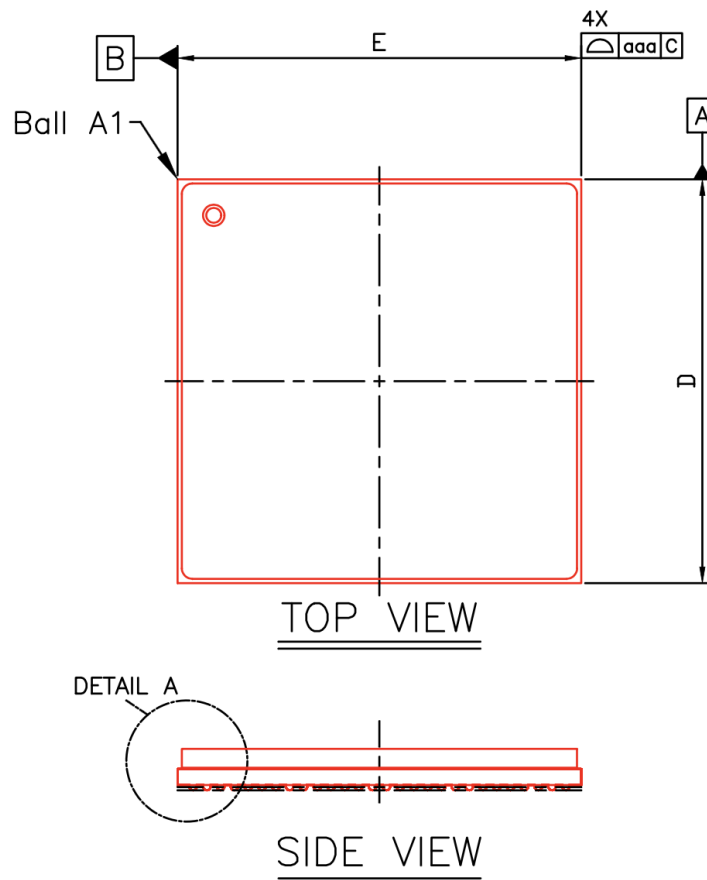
RK1820/ RK1828 Package Top View and Side View
